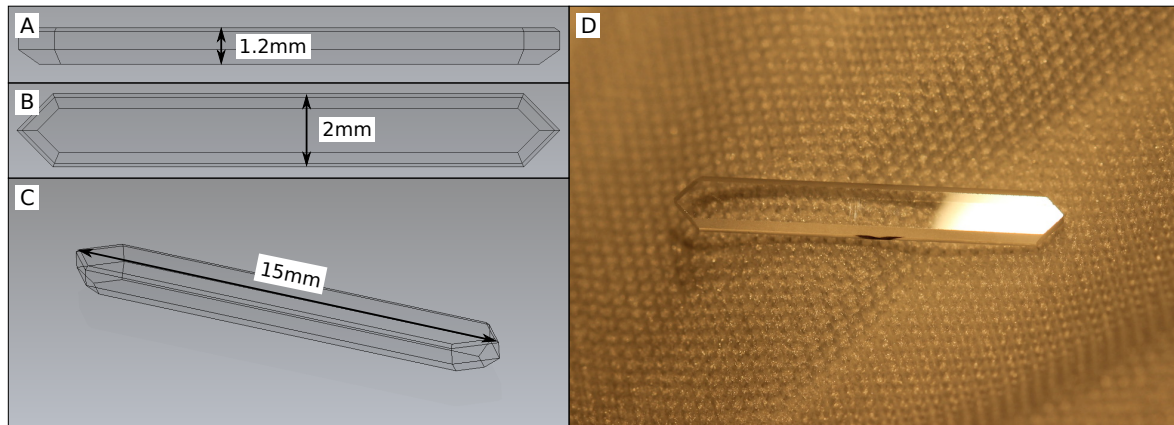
Images A, B and C show different views of a computer-aided-design model of a cradle ear with its main dimensions. Image D shows a real picture of the cradle ear in which the shape can be well identified. The triangular shaped ends will be used as weld points to which the  $10\ \mu\text{m}$  fibres will be welded.
